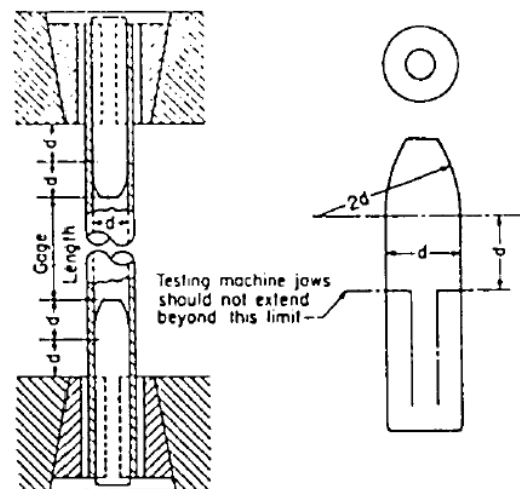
Typical Full-tube tensile specimen grip fixture, ASTM E8, section 6.9.1.
